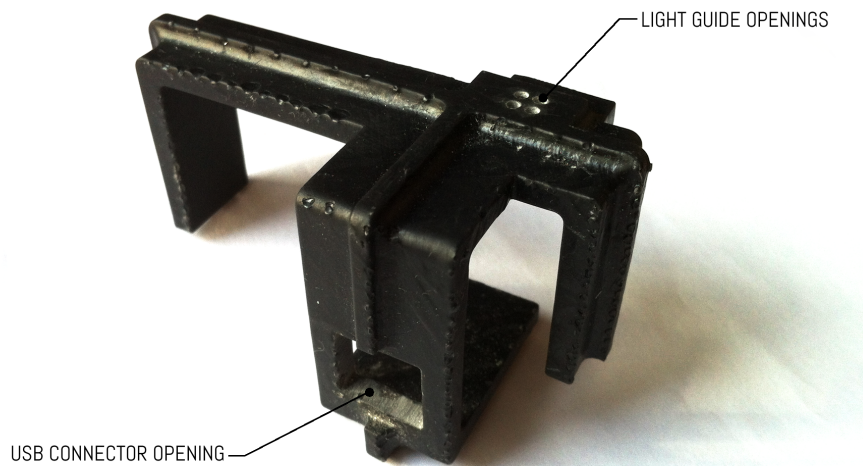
EAG recorder enclosure drill guide. The drill guide is an SLA printed part. The part allowed the drilling of the enclosure to a tight tolerance without the use of positioning stages.
